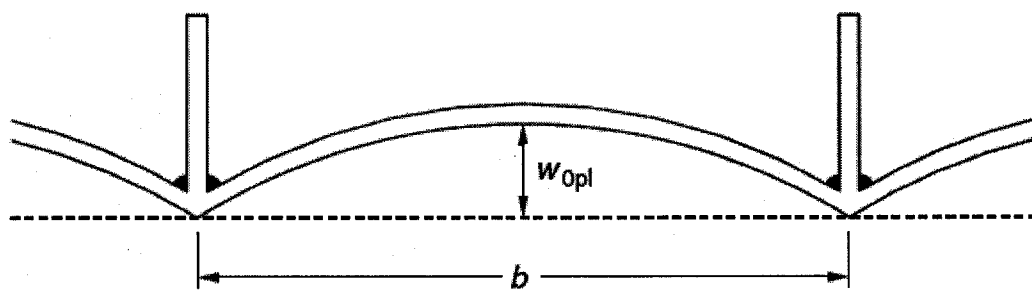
A typical initial deflection pattern in steel plating between stiffeners in the short (plate breadth) direction
